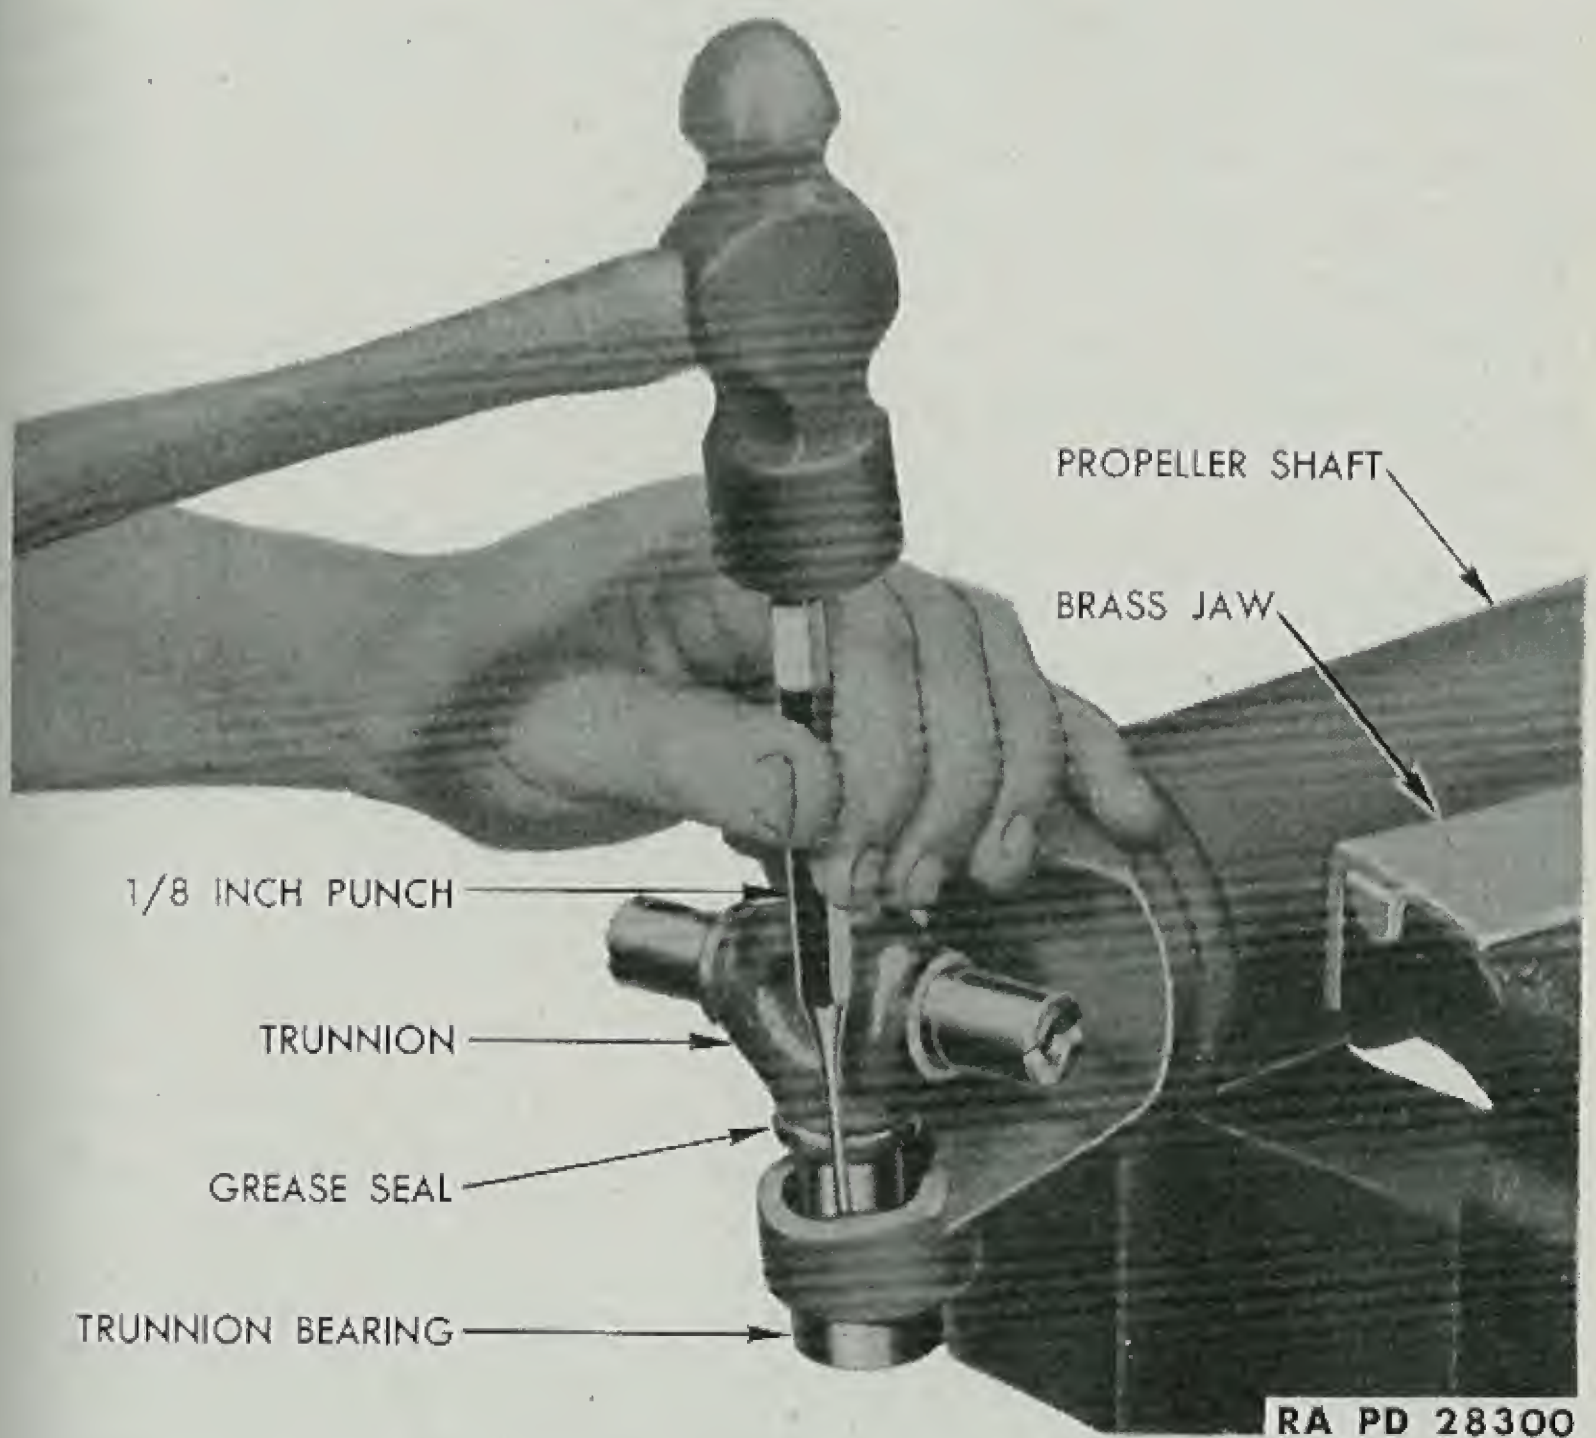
Driving Trunnion Bearing from Yoke with a 1/8-Inch Punch
